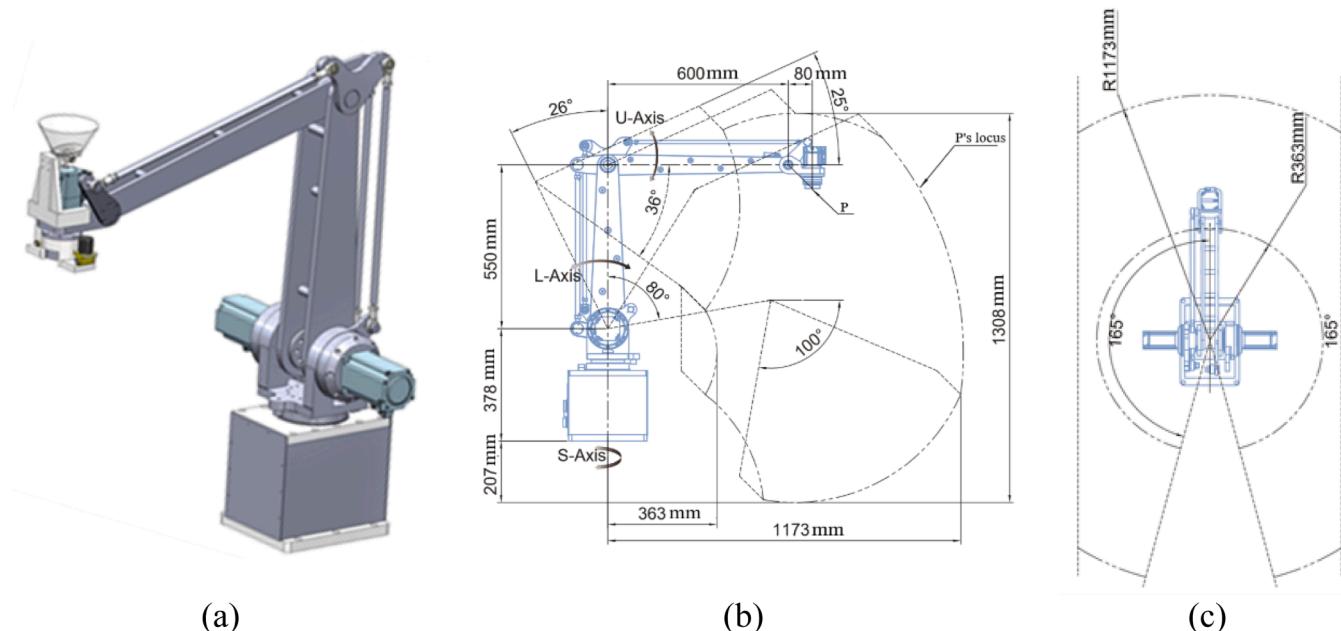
3D diagram and working space diagram of mechanical arm. (a) 3D mechanical drawing. (b) Side view of mechanical arm workspace and dimensions. (c) Top view of mechanical arm workspace.
